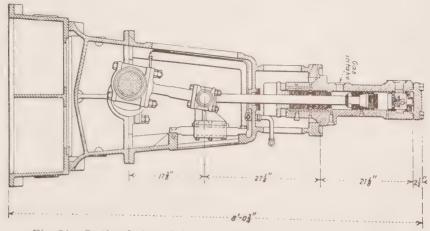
Sectional view of three cylinder carbon dioxide compressor.
